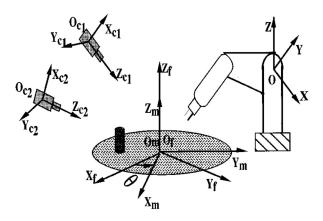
Parts Sorting Task with Robotic Manipulator and Disc Conveyor [Song 2000].
